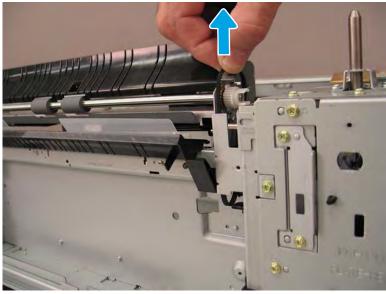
Remove the HCI drive assembly - sub-pulley
